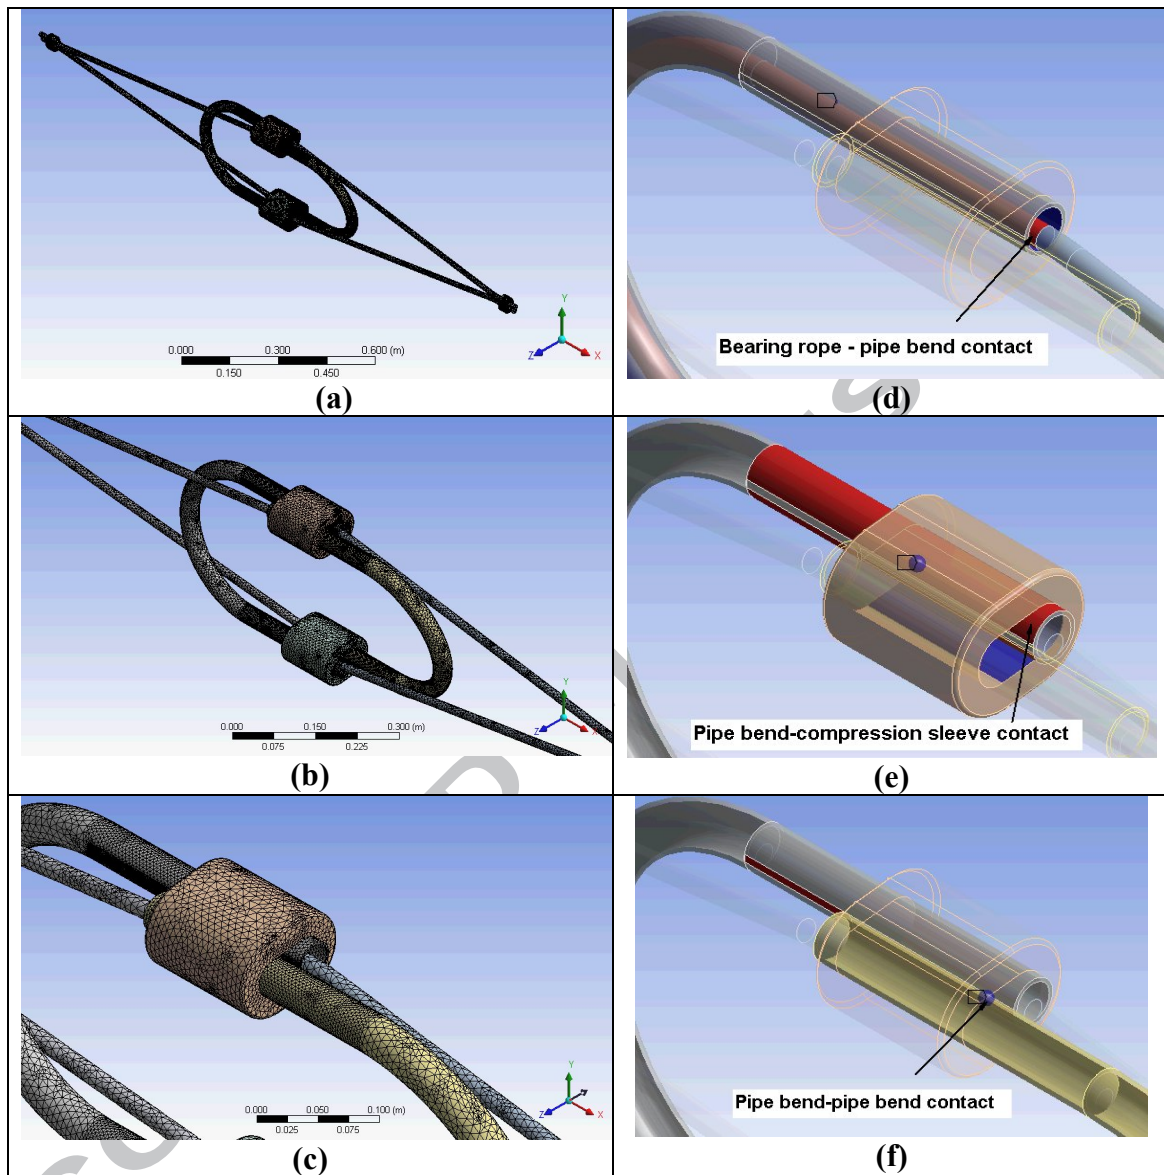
Finite element mesh and contact details: (a) Overall mesh, (b) Pipe bend mesh's detail, (c) Compression sleeve mesh's detail, (d) Bearing rope-pipe bend contact's detail, (e) Pipe bend-compression sleeve contact's detail and (f) Pipe bend-pipe bend contact's detail.
